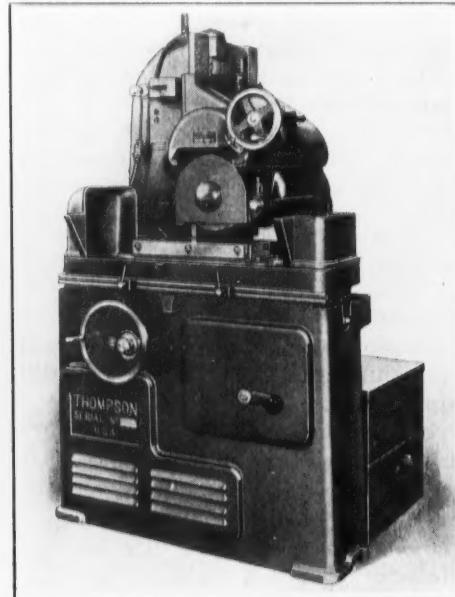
Hydraulic Surface Grinder Designed for Tool-room Use
